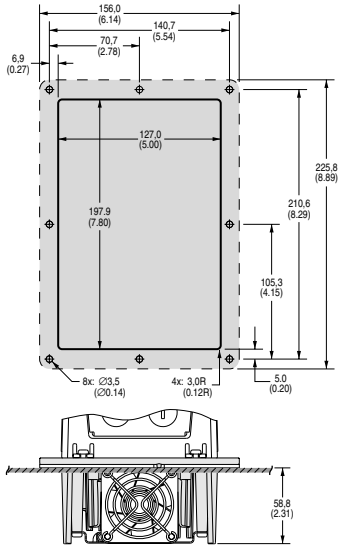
PowerFlex 70 Flange Mount Bottom View Dimensions
